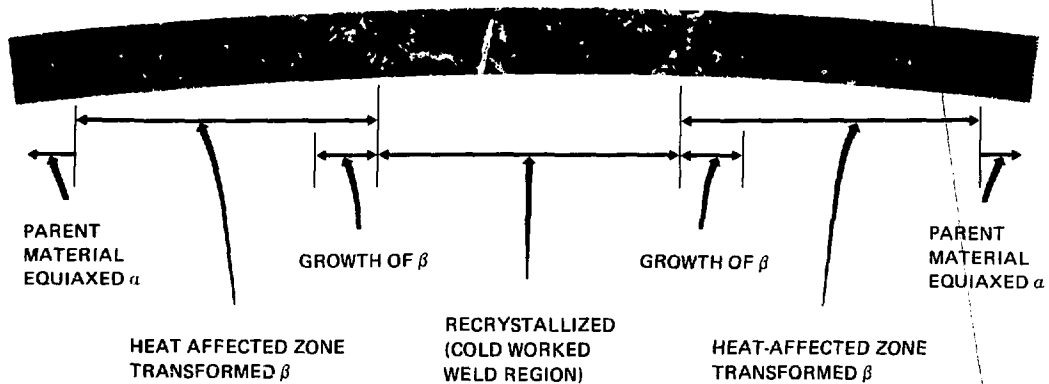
WELD CROSS SECTION FROM WELDED, SEAM-LEVELLED AND ANNEALED ZIRCALOY-2 CALANDRIA TUBE
